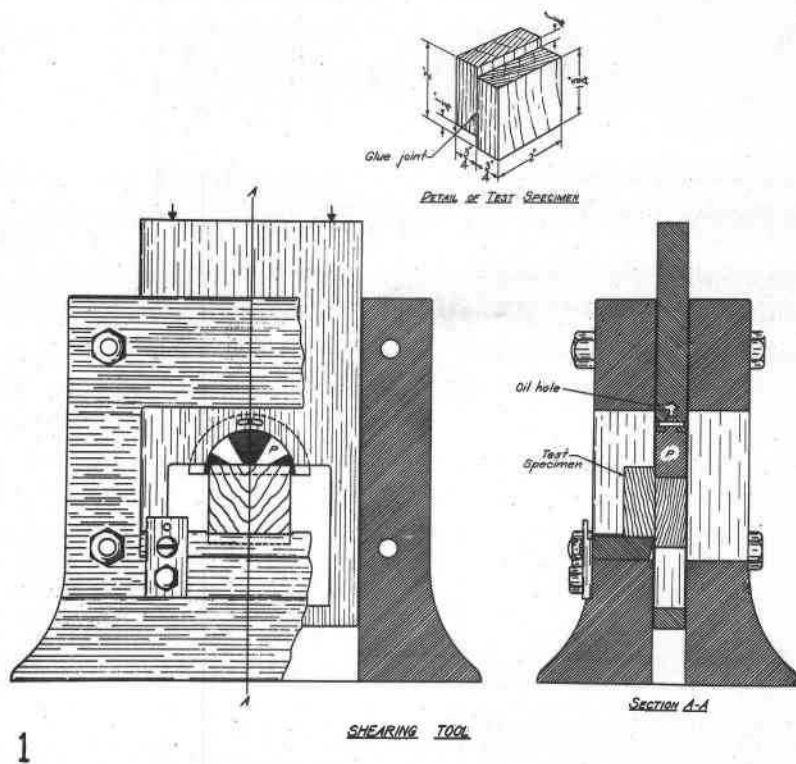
Shearing tool, test specimen, and testing machine used for the Forest Products Laboratory's glued wood joint test.
